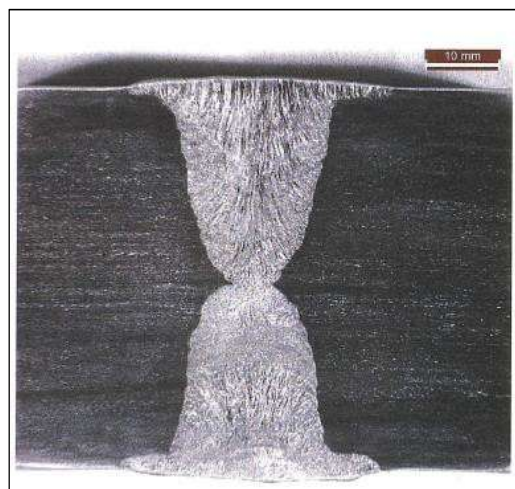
Macrograph of GTAW Hot wire joint 55-mm thick
